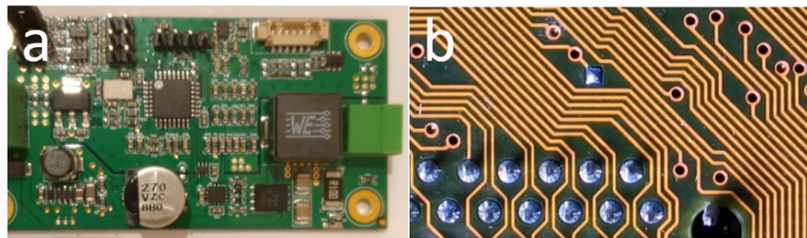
Image of a conventional printed circuit board (PCB) with components soldered in place (a). Close up of copper interconnects that carry electrical signals and power in a PCB (b).
